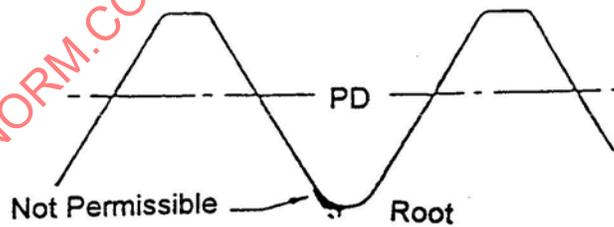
ROOT DEFECTS, ROLLED THREAD
